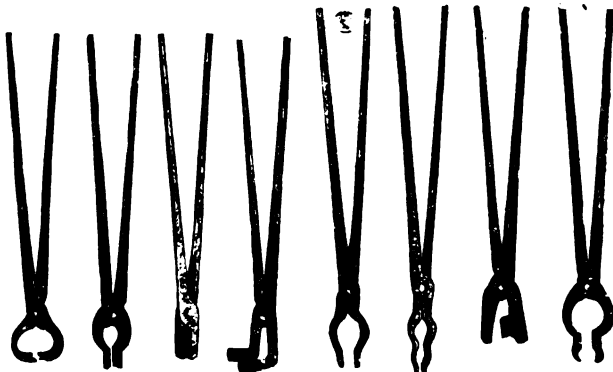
Fig. 701. Fig. 702. Fig. 703. Fig. 704. Fig. 705. Fig. 706. Fig. 707.
